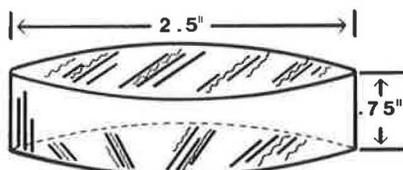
Glaze-stabilized consolidation specimen, settlement reinforcement.
